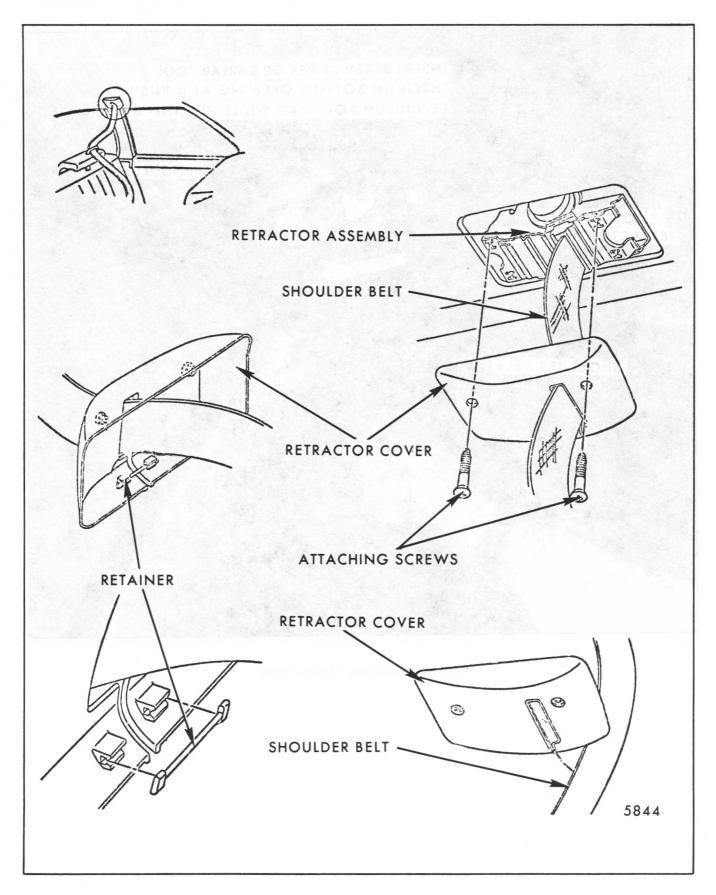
Shoulder Belt Retractor Cover Removal
